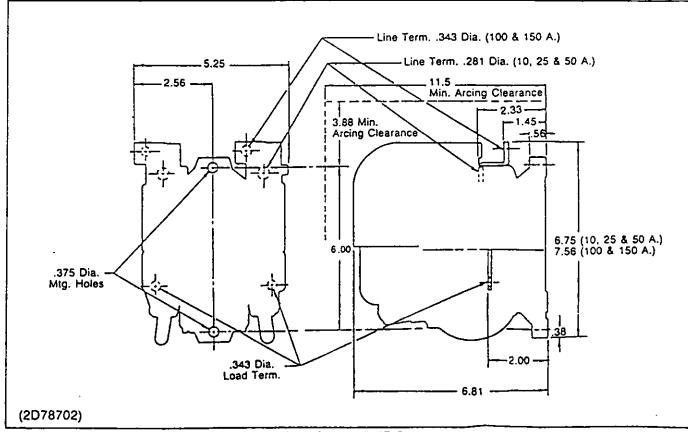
Dimension Drawings (Dim. in inches) of 2 NO Pole MME Contactor
